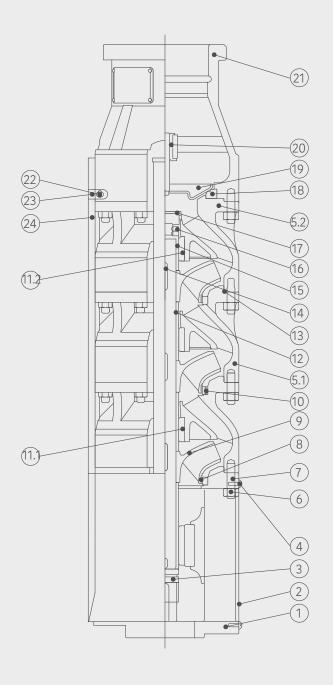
Cross-section view of 8 inch radial flow submersible pump
